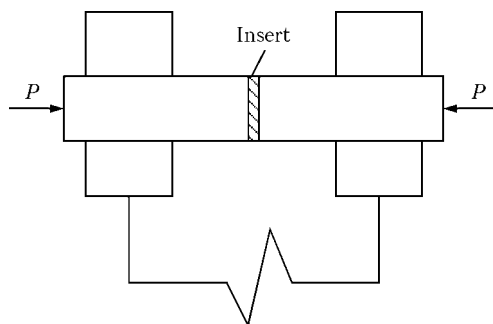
Scheme of resistance welding with use of a composite insert
